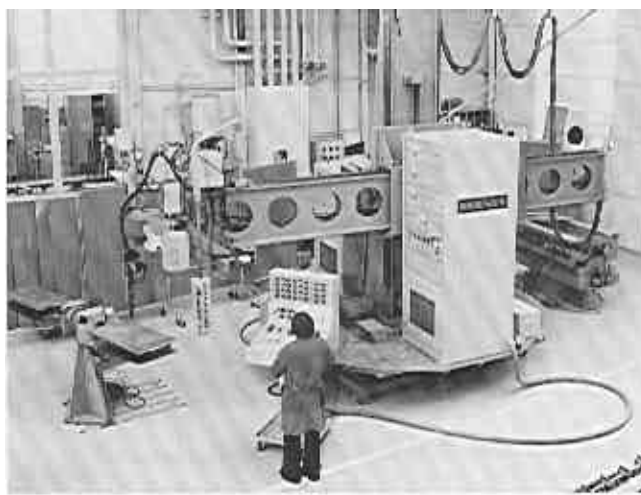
Automatic TIG welding using pulsed current by Type 612 Sciaky machine.
